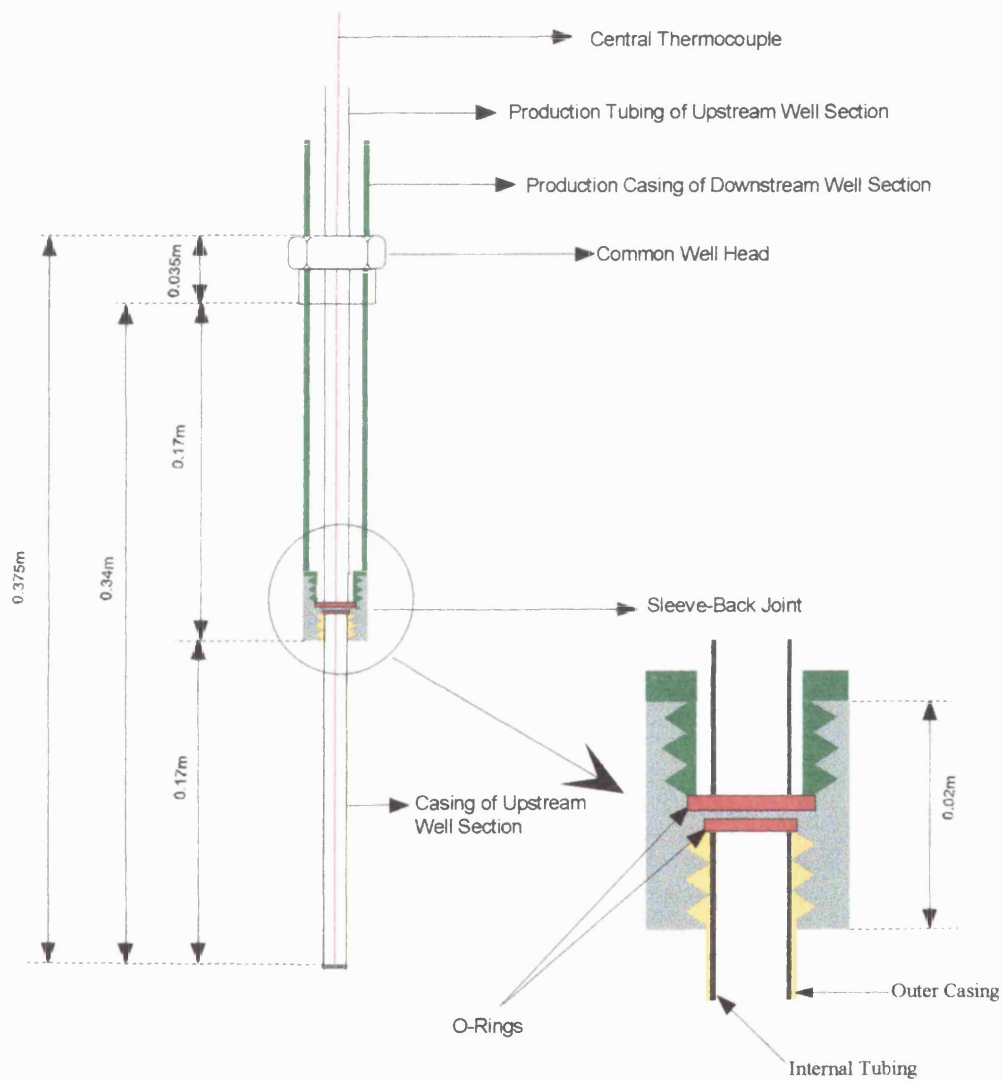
Co-aligned horizontal well assembly using sleeve-back mechanism
